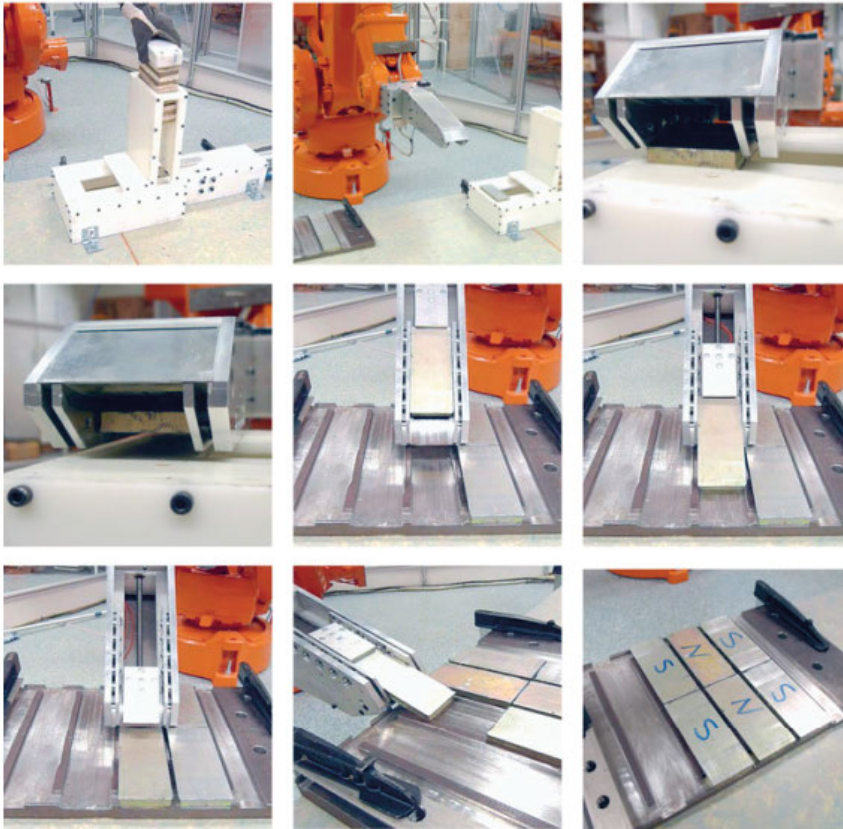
An overall view of the tools during the PM assembly process [Paper VIII]
